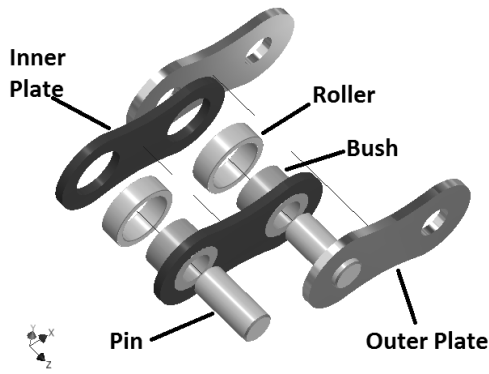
Exploded model of a bush-roller chain inner and outer link showing key components.
